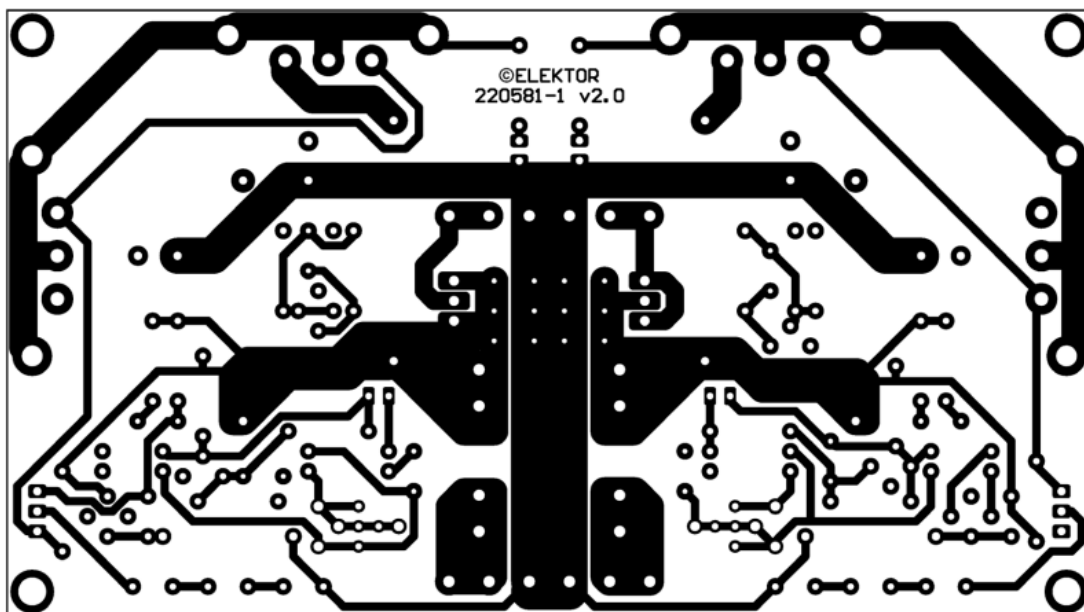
Copper on bottom of the PCB of the +40 V Linear Voltage Regulator.
